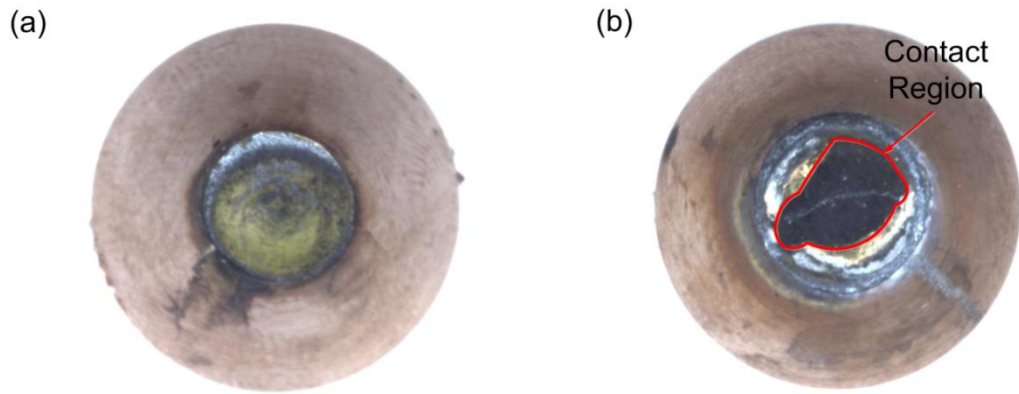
Top views of worn GB electrodes. (a) 10 welds. (b) 200 welds
